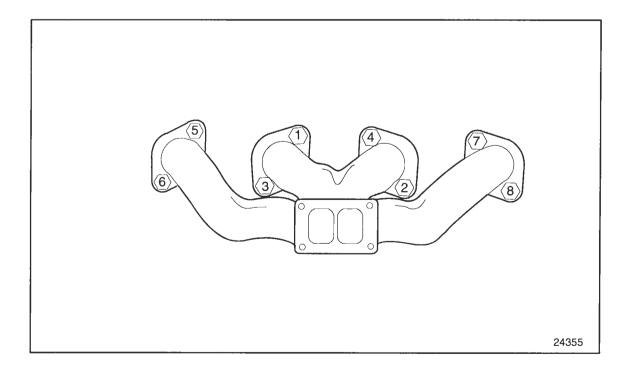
Exhaust Manifold Bolt Tightening Sequence
